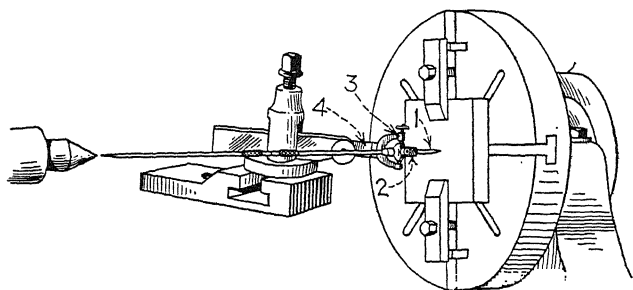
Center tester or "wiggler" (L. S. Starrett Company). The needle (1) is adjustable lengthwise in ball chuck (2). The ball chuck is pivoted to form a universal joint (3) when indicating a prick punch mark. It may be converted to a single pivot and a  $\frac{3}{16}$  in. steel ball slipped over the point of the needle for indicating holes or buttons. The flexible steel ribbon (4) keeps the even pressure of the needle or ball against the work.
